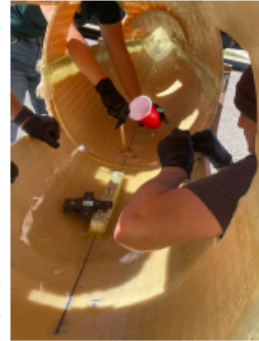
Team members gluing in a 3D printed part to prepare EXLIENI's control surfaces for a pool testing (Spring 2024).
